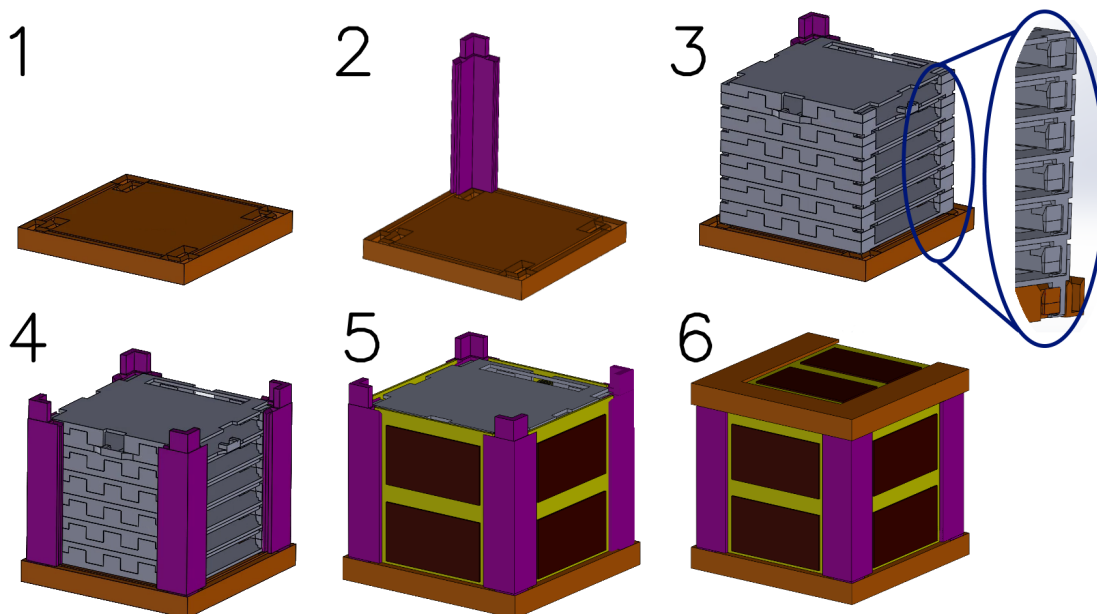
The six steps to performing assembly of the custom structure. Not pictured are the magnetic targets on each part.
